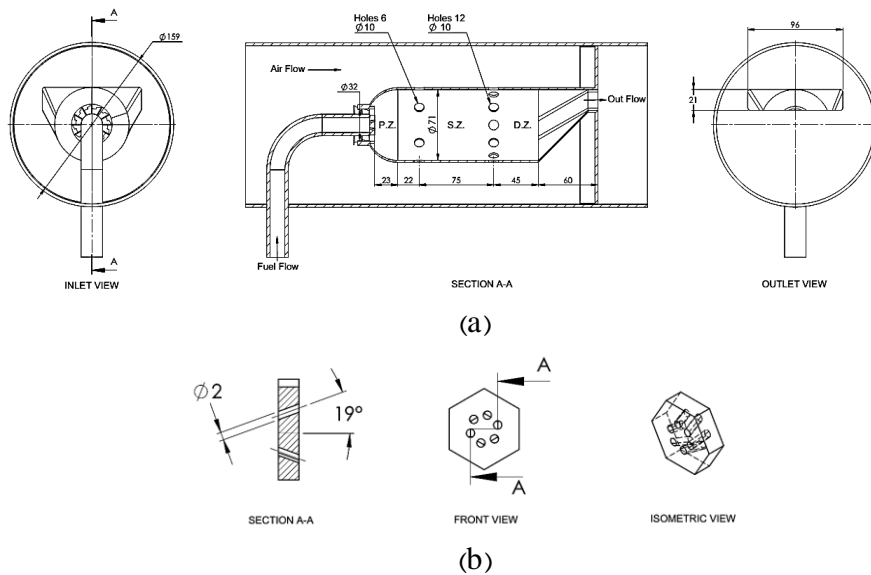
Geometry of test stand (a) combustion chamber and (b) fuel injector
